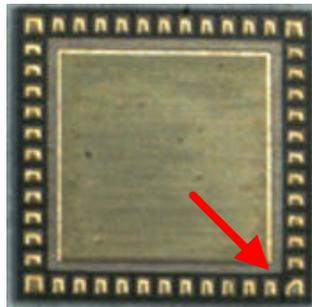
Leadless CSP with Odd Shaped Corner Pad
